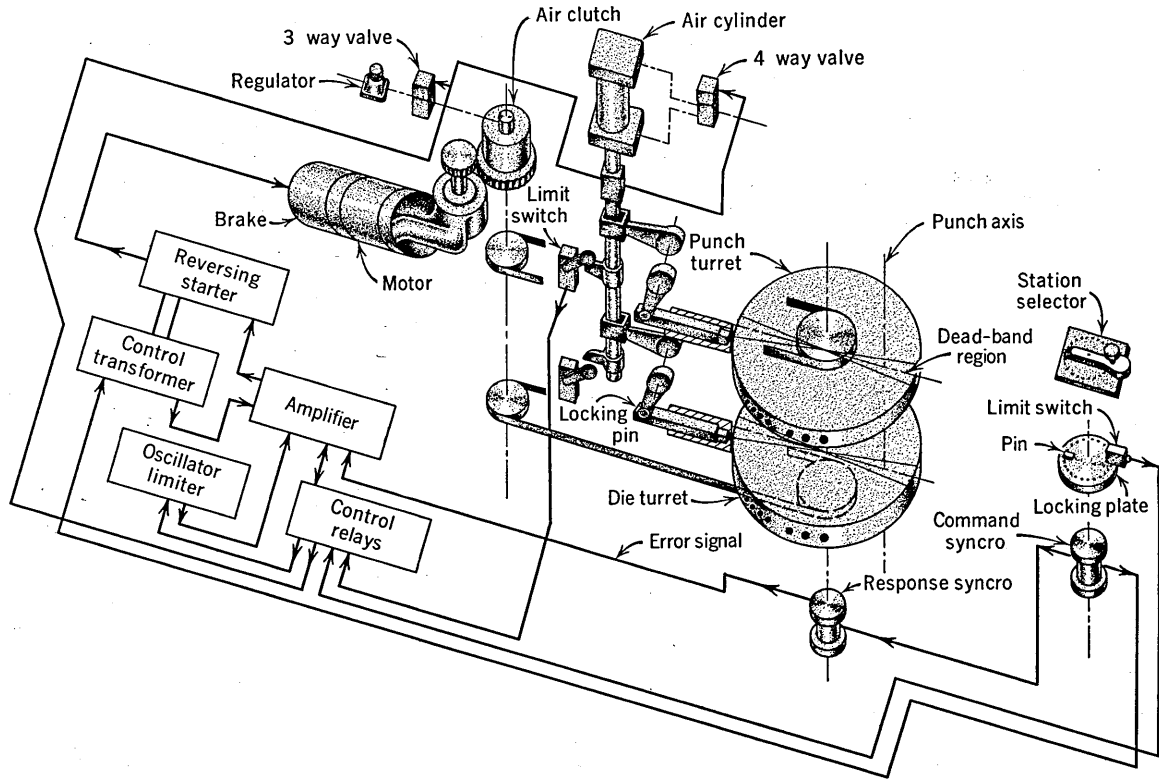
Turret punch press servo-positioning system (Courtesy Wiedemann Machine Co.)
